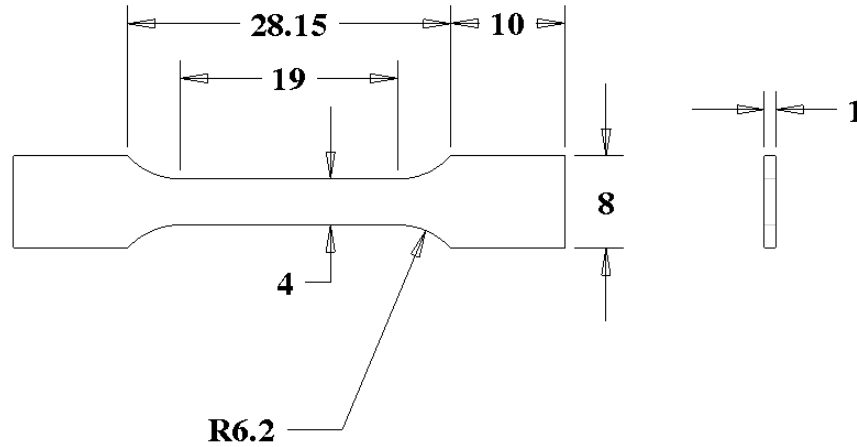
Schematic of sub-sized specimen for tensile test (All dimensions in mm).
